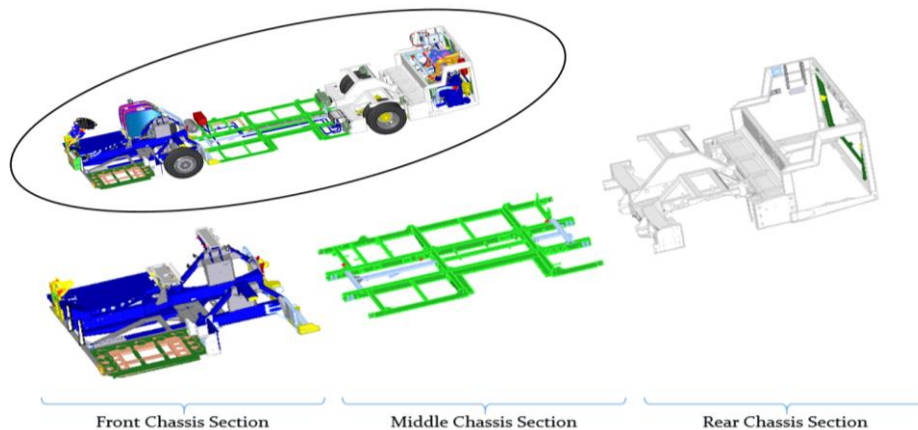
The chassis of an Enviro400 DD bus. Top: Full equipped chassis structure and drivetrain (6,800 kg). Bottom: The bare front, middle and rear chassis sections (2,000 kg).
